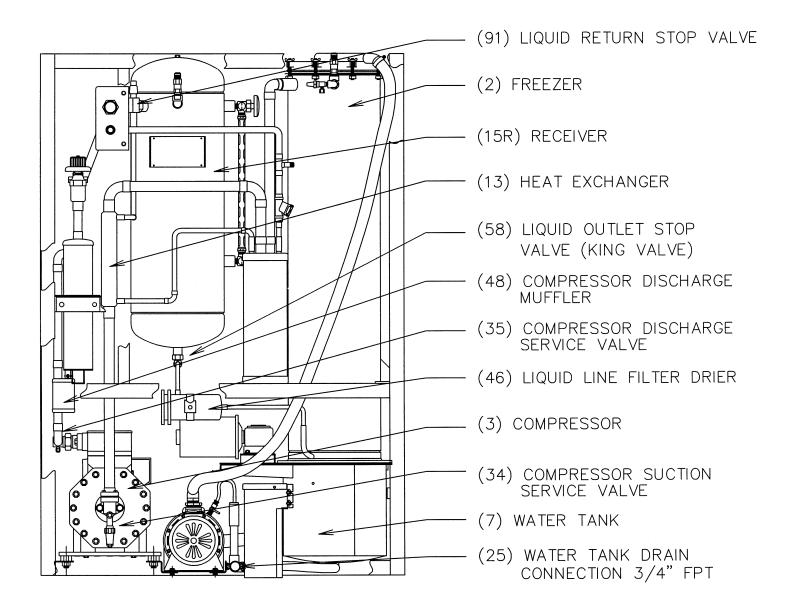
Assembly (Air-Cooled) Rear View
